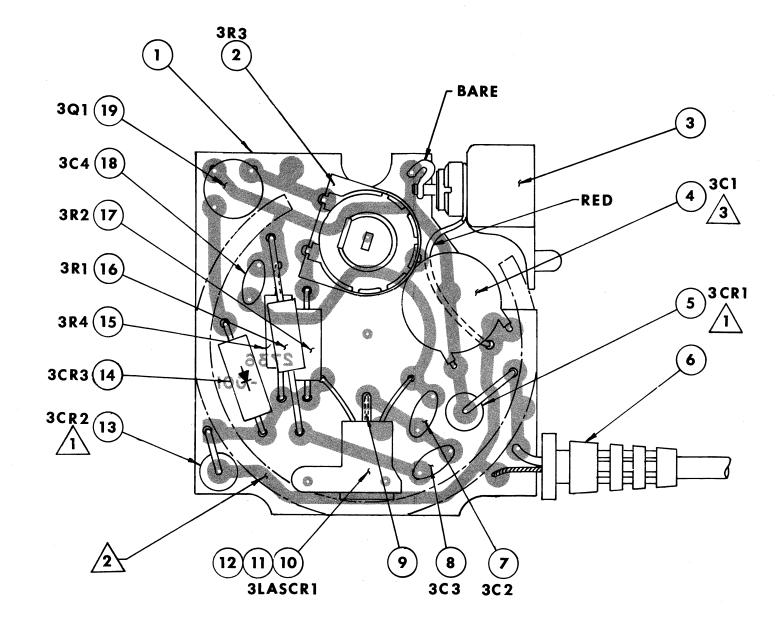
Circuit Board Assembly -Remote Sensor Accessory
